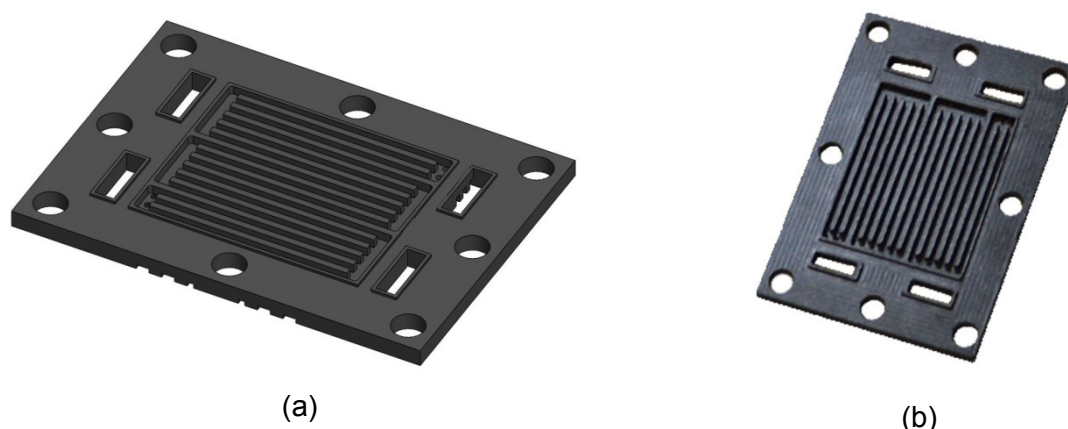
Designed and machined graphite bipolar plate (a) CAD solid model (b) photograph of machined bipolar plate.
